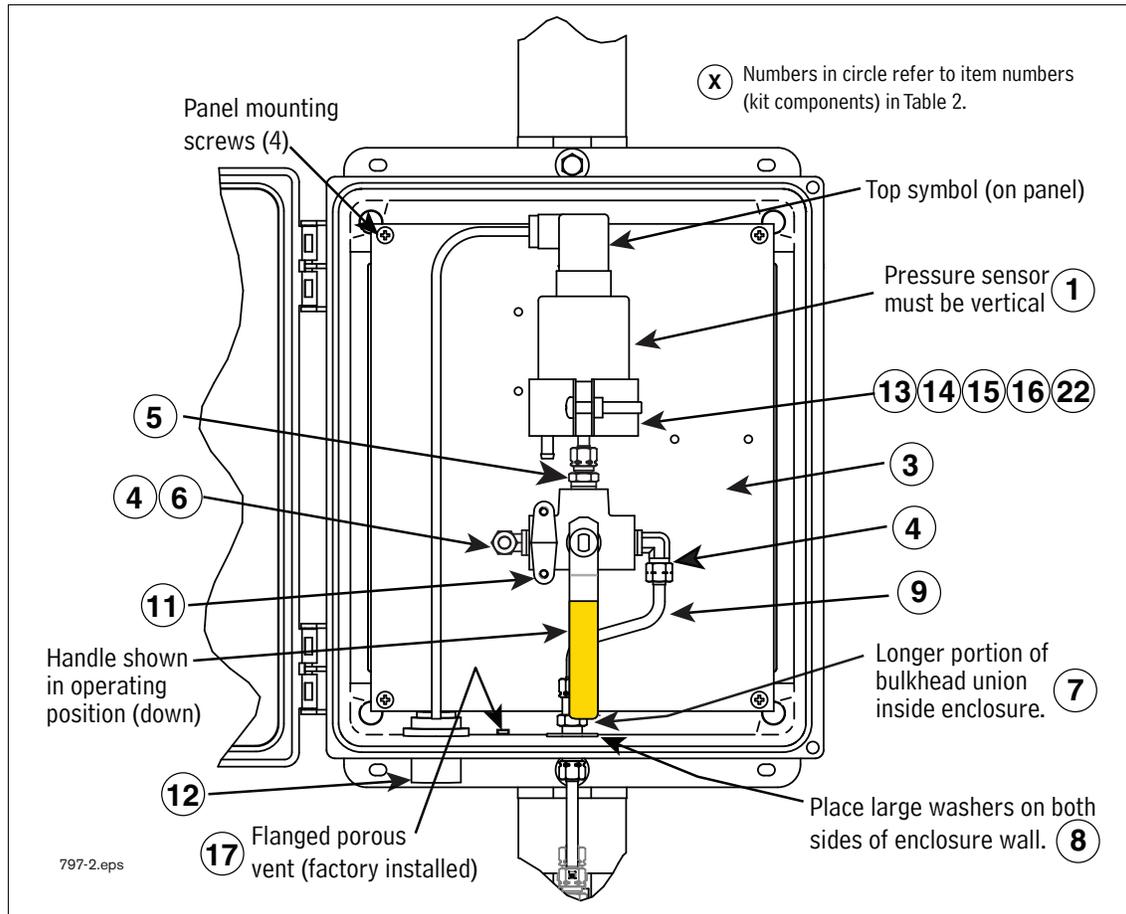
Mounting Pressure Sensor Assembly onto Composite Panel
